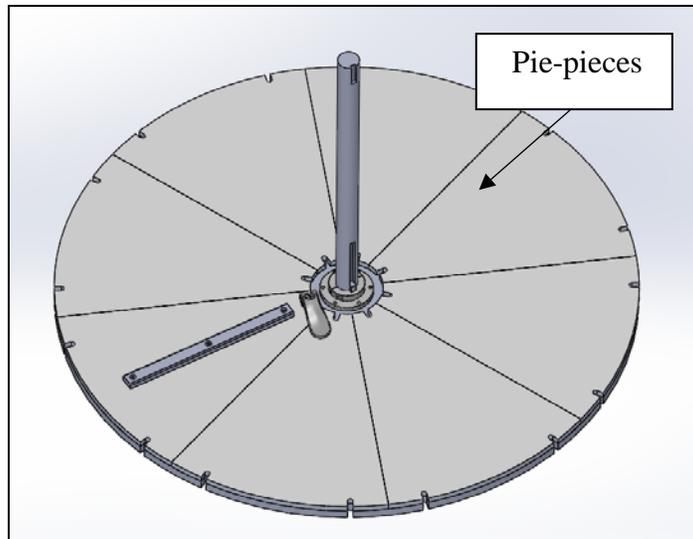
Turntable Assembly with pie-pieces (only one slat mounted to pie-piece)
